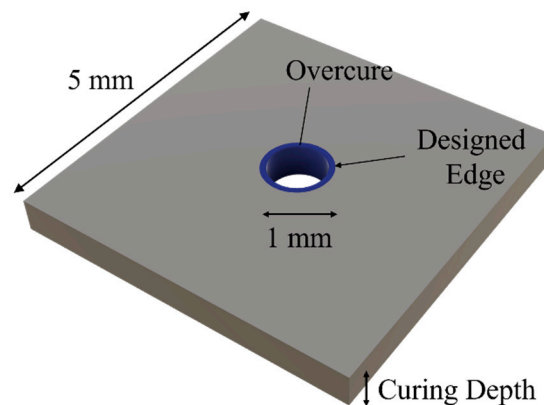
Test specimen of 5×5 mm with a 1 mm diameter hole in the center.
